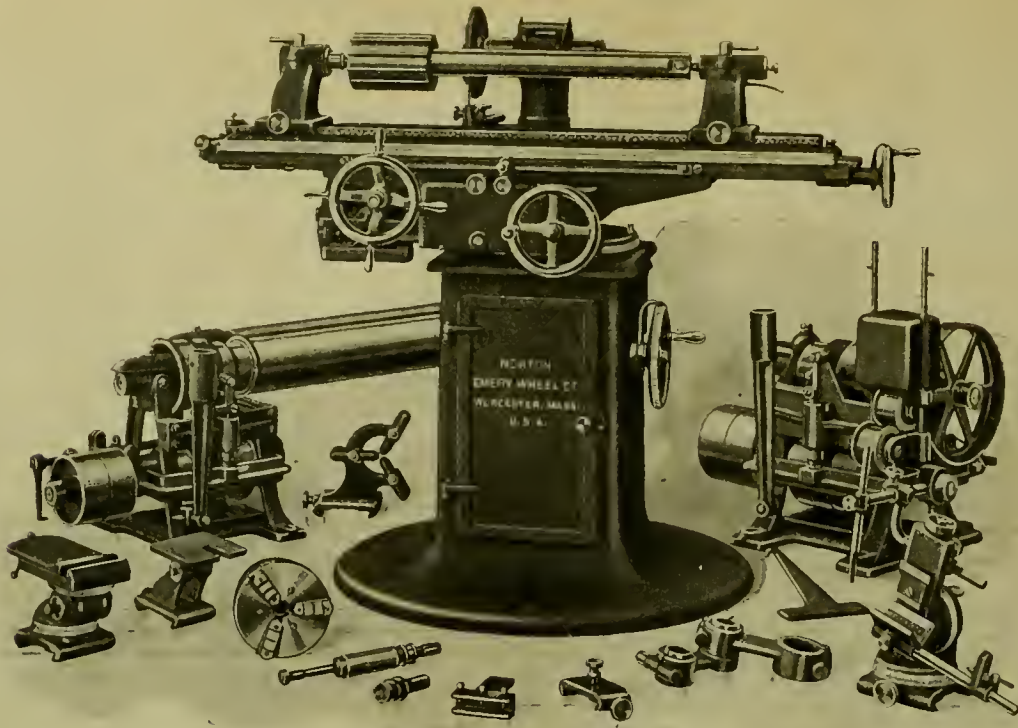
NO. 2 UNIVERSAL TOOL AND CUTTER GRINDER, NORTON EMERY WHEEL COMPANY.
